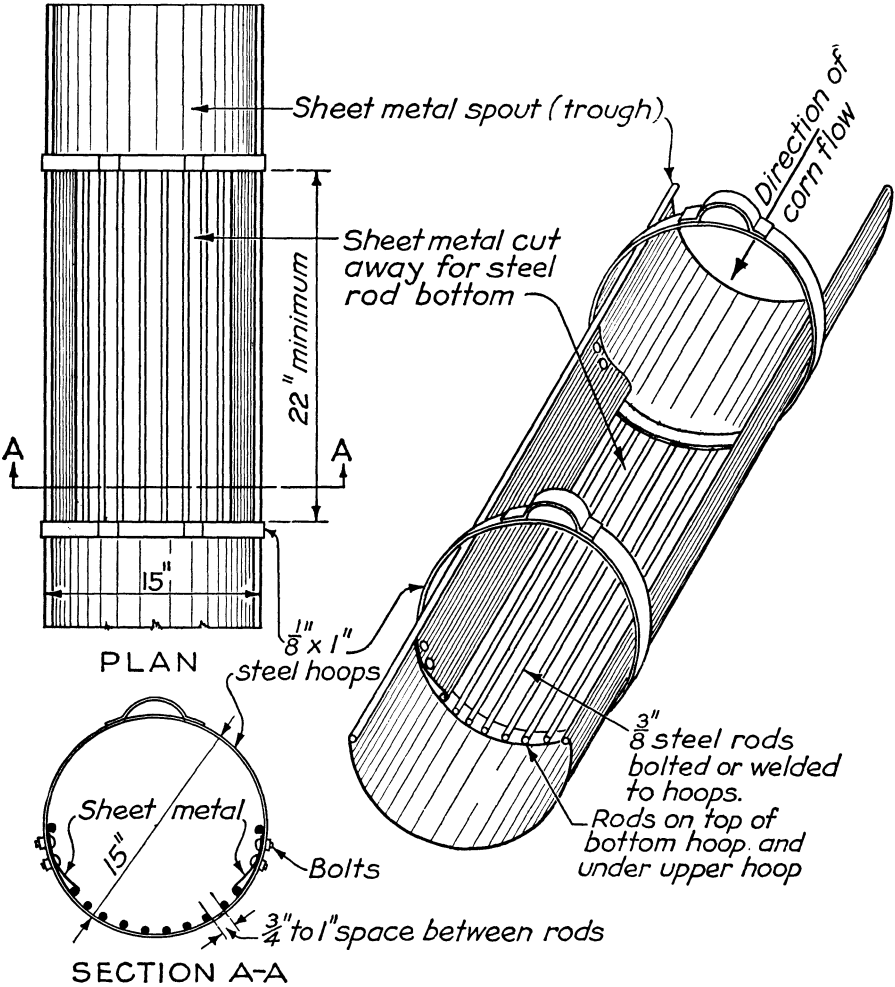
Section of spouting of grain chute equipped with rod-bottom separator, by use of which the ear corn passes into the crib and the shelled corn, chaff, and dirt is removed.
